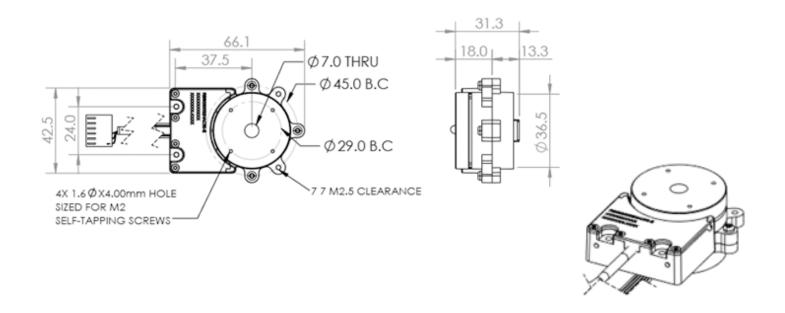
Mechanical drawing (mm) of RBS Hollow Shaft Rotary Motor with Installed Encoder
